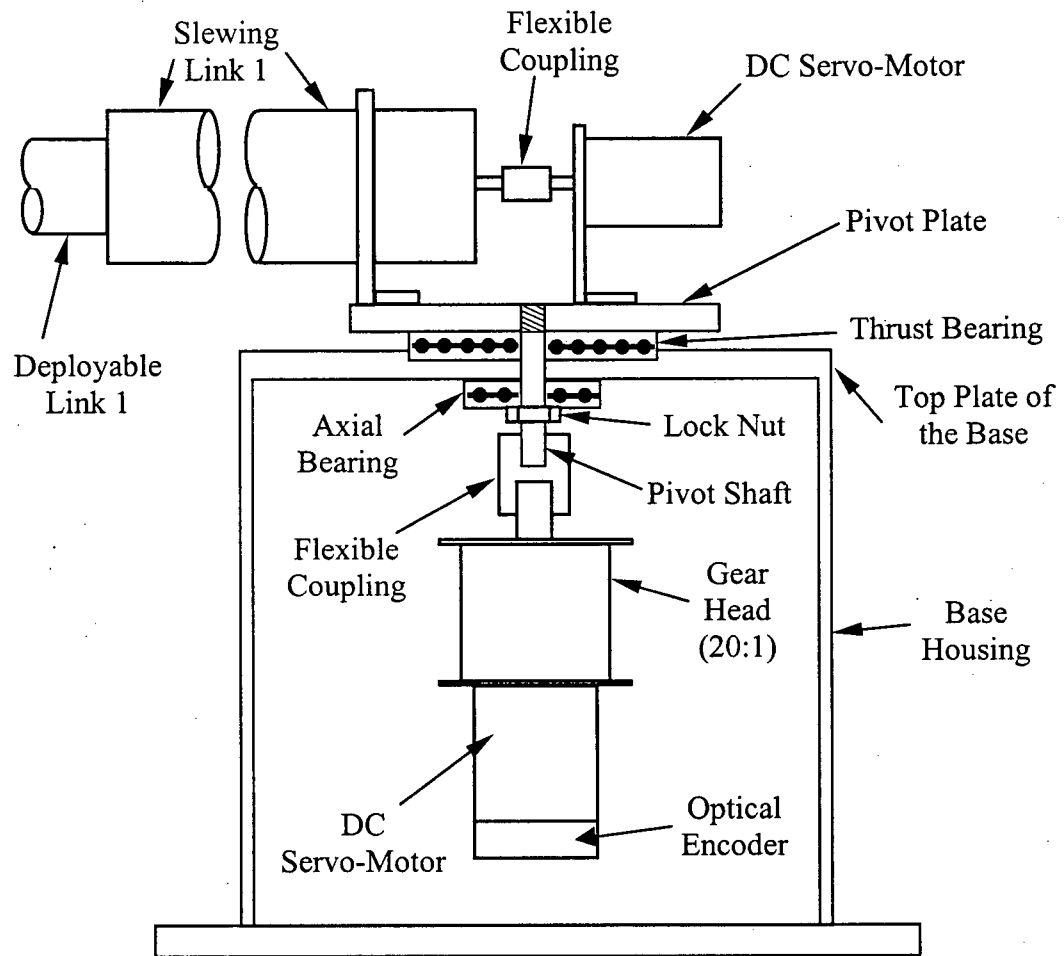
Main components of the manipulator base assembly (Module 1).
